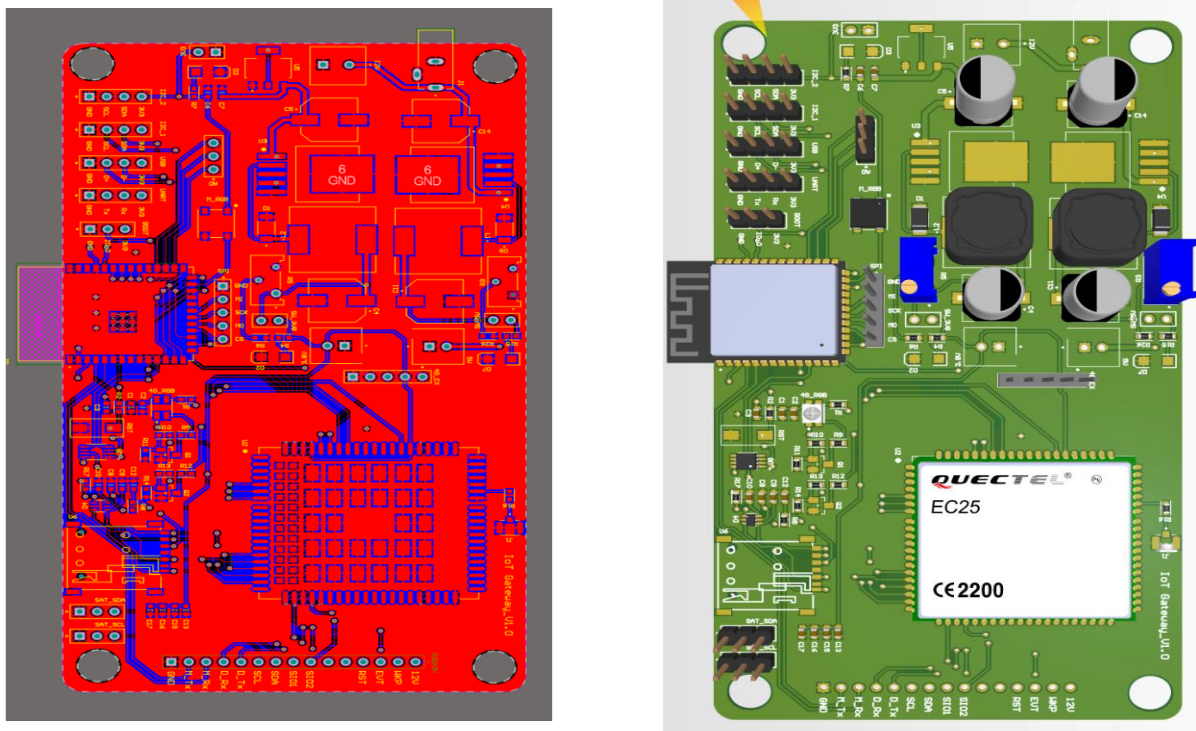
PCB Layout Gateway Unit: 2D & 3D
